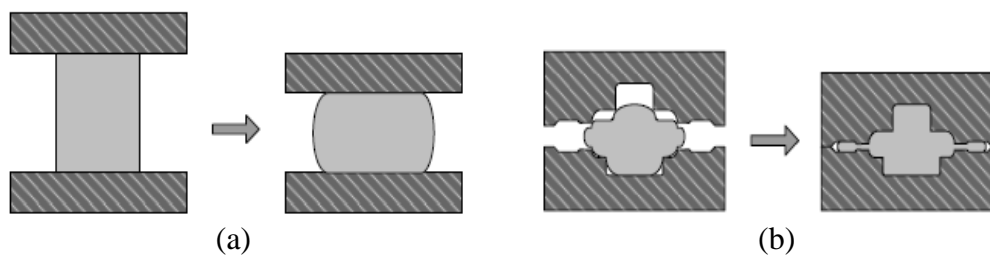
Illustration of (a) Open-Die Forging (b) Impression-Die Forging.
